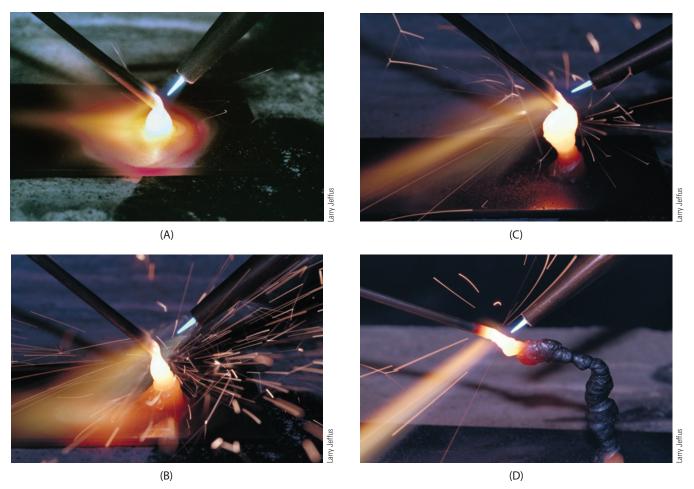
By flashing the flame off and controlling the pool size, a weld can be built up (A), and up (B), and over (C), and over (D).
